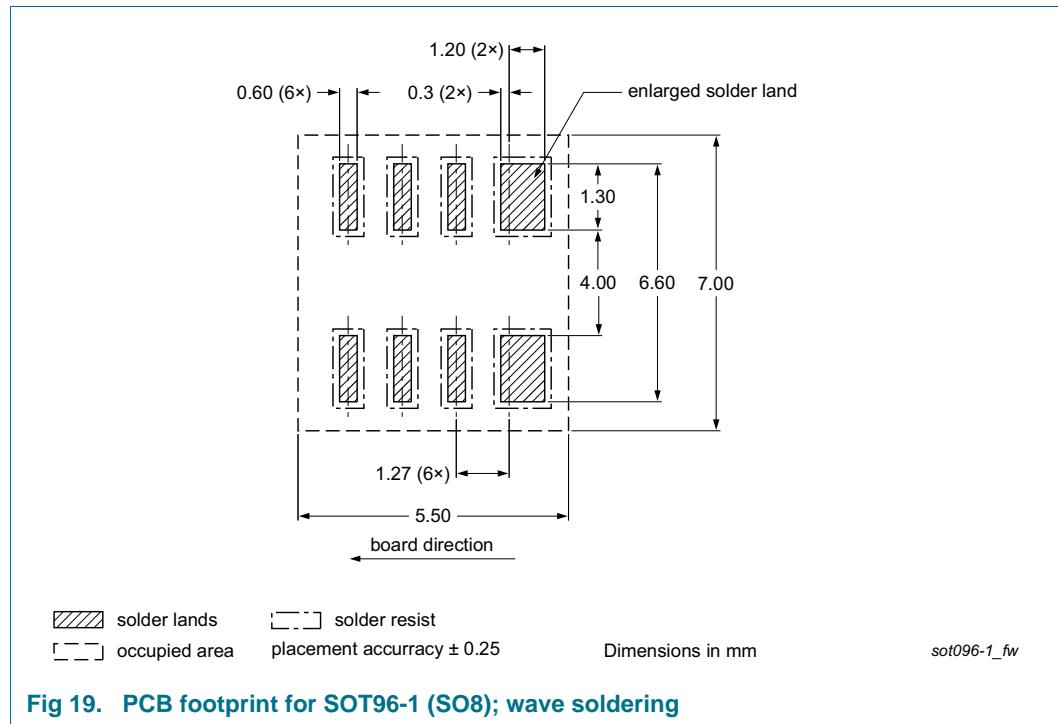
PCB footprint for SOT96-1 (SO8); wave soldering
